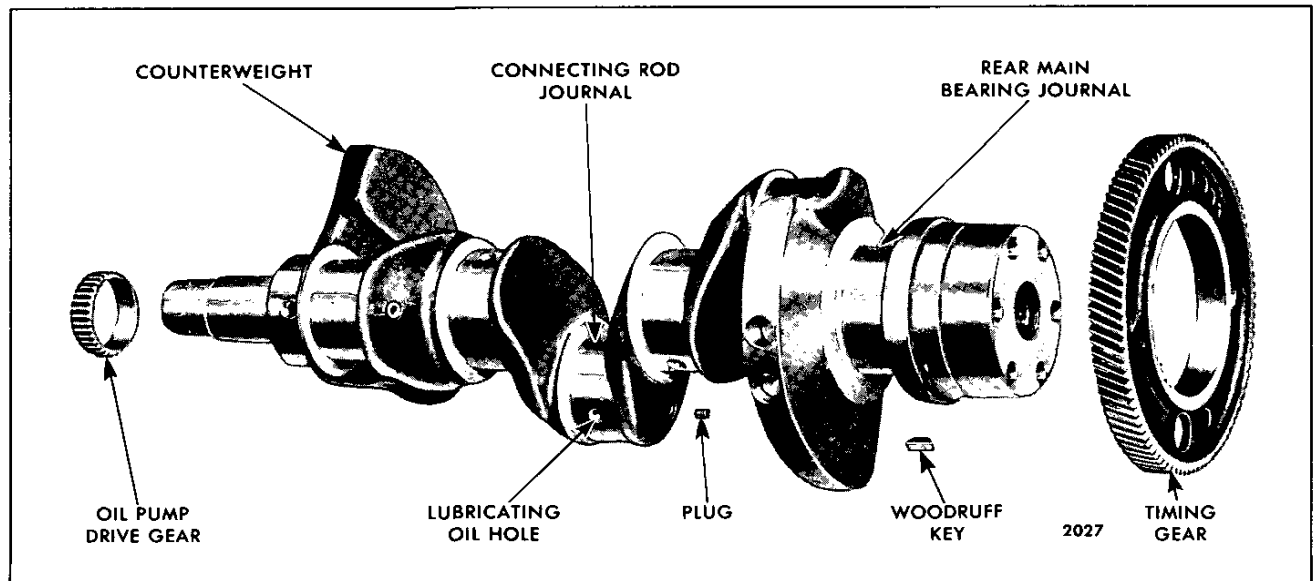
Crankshaft Details and Relative Location of Parts (3-53 Crankshaft Shown)
